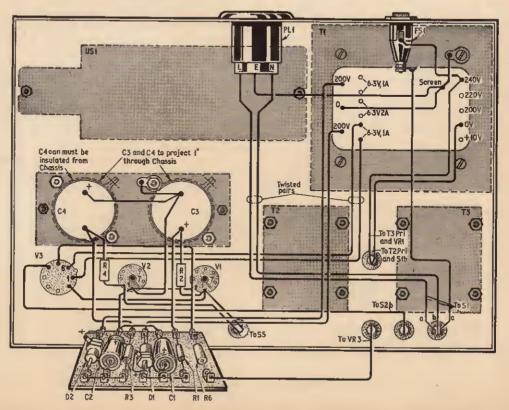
Underside wiring of the chassis. The group board is tilted to show the component wiring clearly
